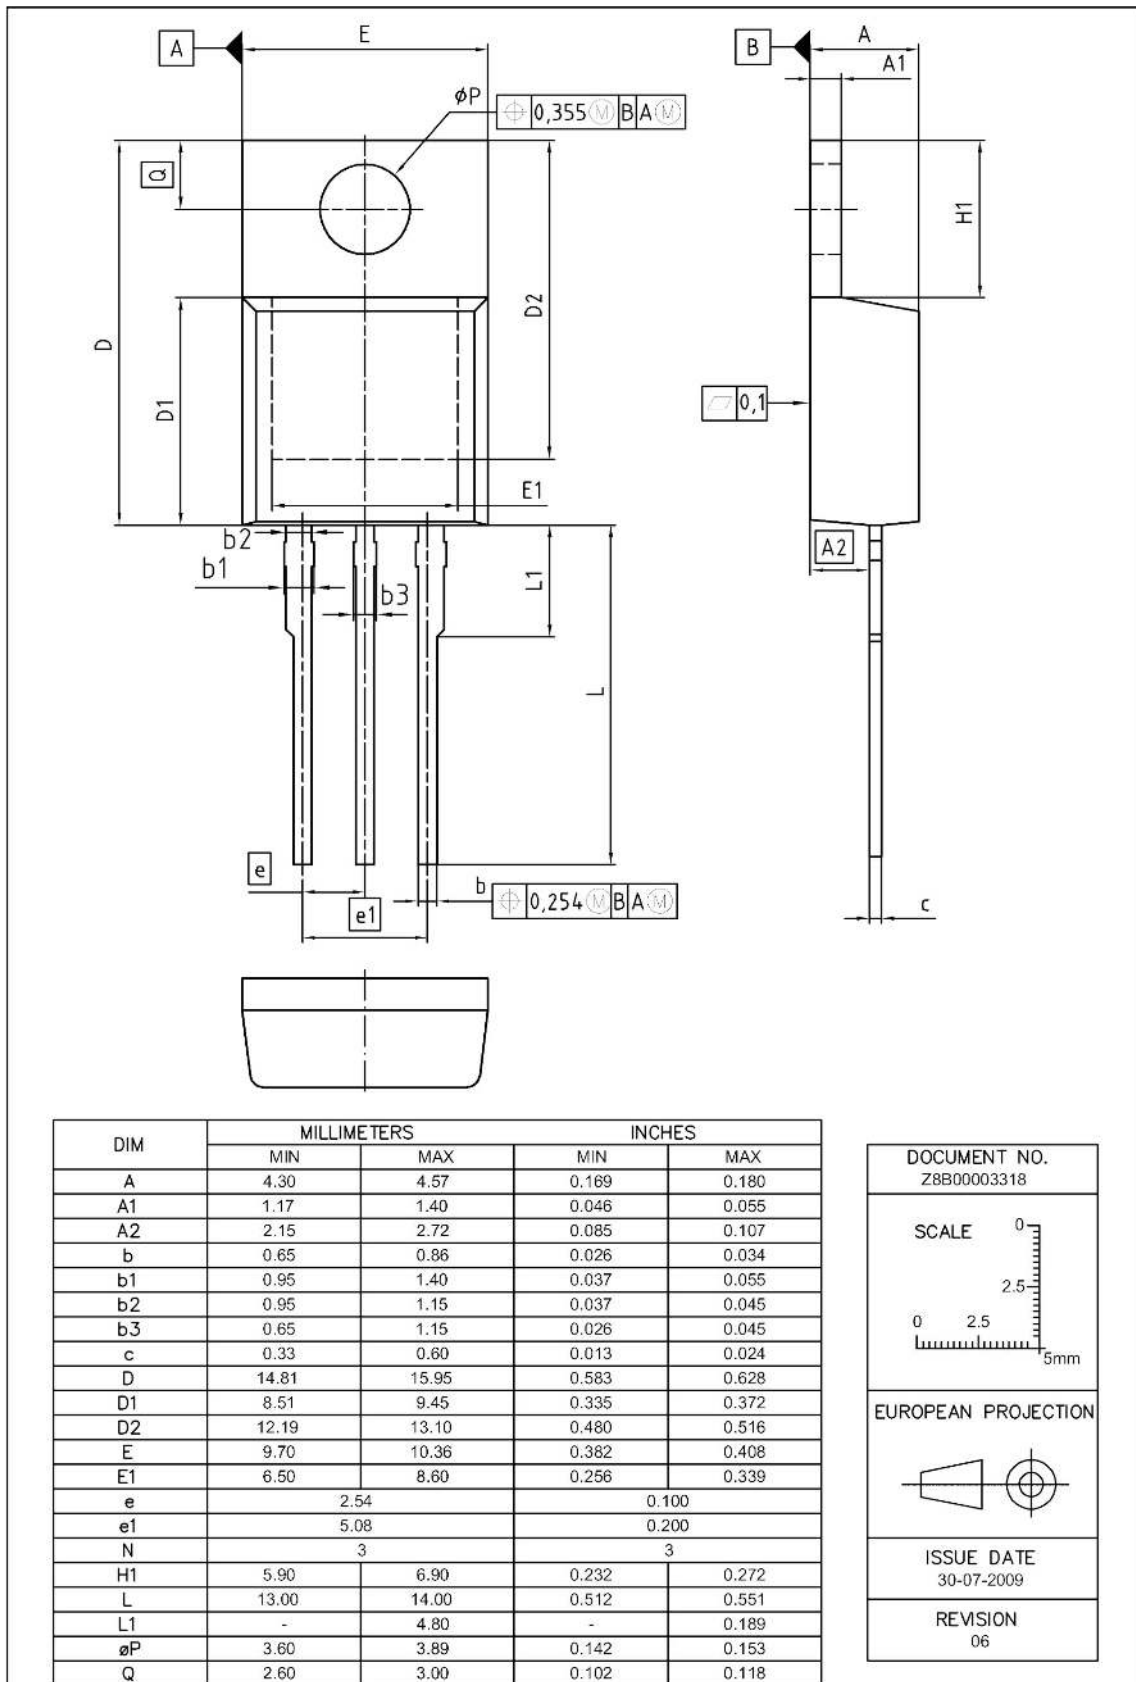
Outline PG-TO 220, dimensions in mm/inches
